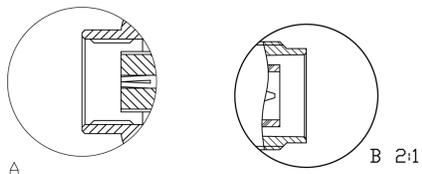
DIN-9H4R-2DI Base Unit Mounting Dimensions
